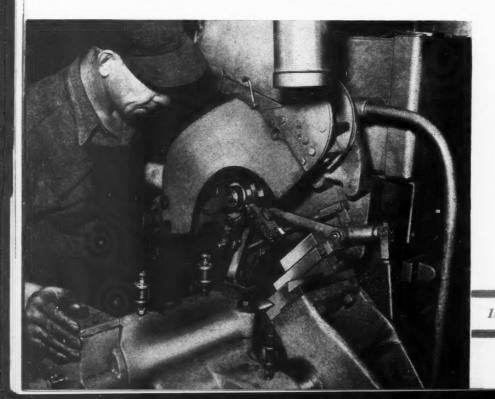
An automatic loading and unloading mechanism is provided on the lathe illustrated, which turns, chamfers, and faces valve-stem guides
